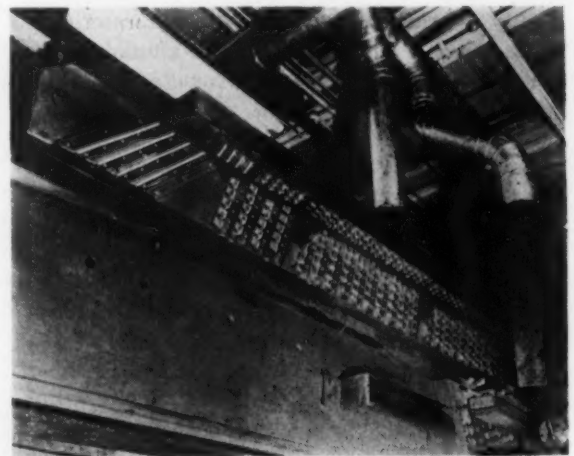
The larger broaches machine the two faces of the cast iron cylinder heads. Rail broaches, similar in design to the main broaches, machine the two sides of the castings. Broaches are clamped onto the machine columns.
